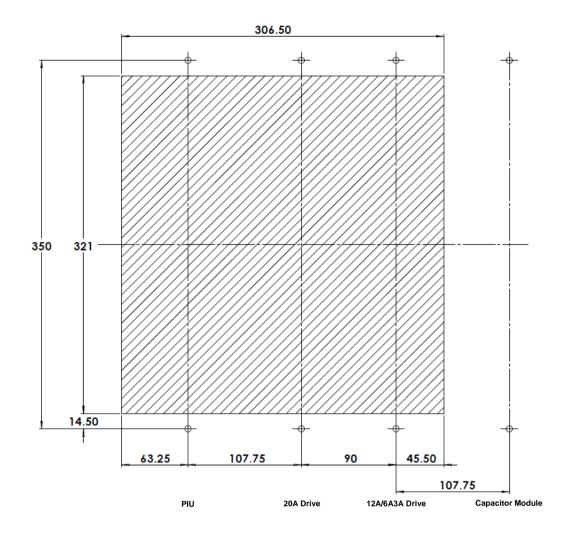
PIU, 20A and 12A/6A/3A drives heatsink cut-outs and Capacitor Module hole mounting hole positions in an array Recessed mount
